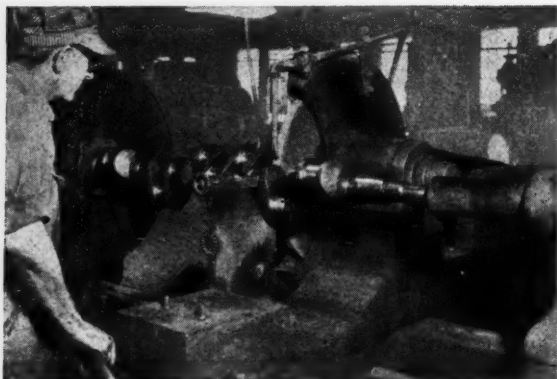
Regrinding an Internal Combustion Engine Crankshaft
